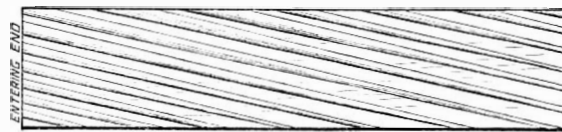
SCREW FORMING SURFACE OF DIE.
